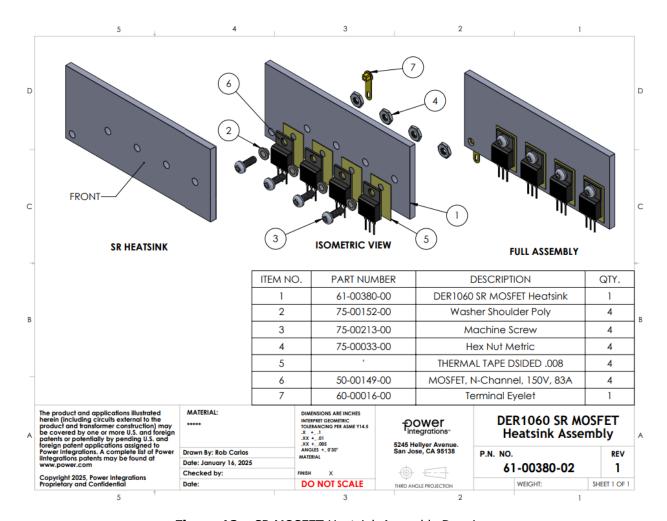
SR MOSFET Heatsink Assembly Drawing.
